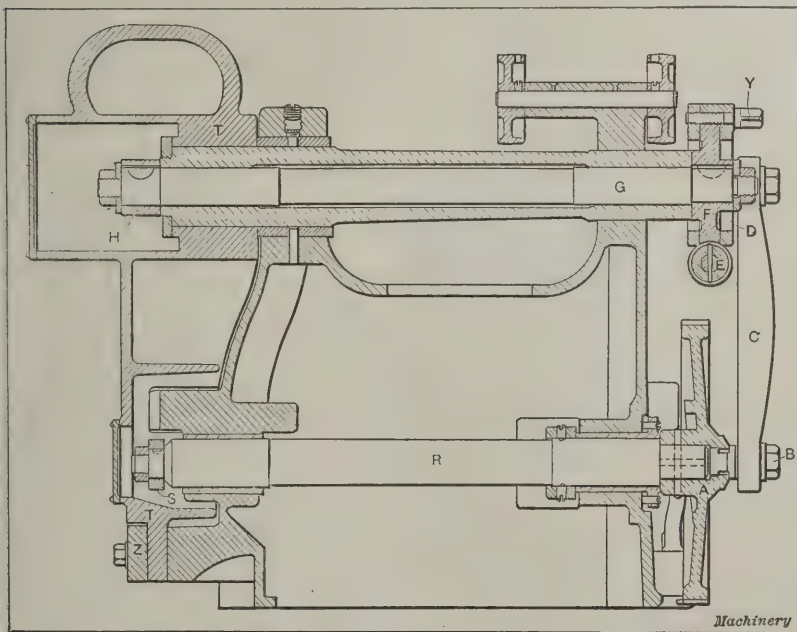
Vertical Section, showing Drive for Cutter-spindle and Relieving Mechanism
